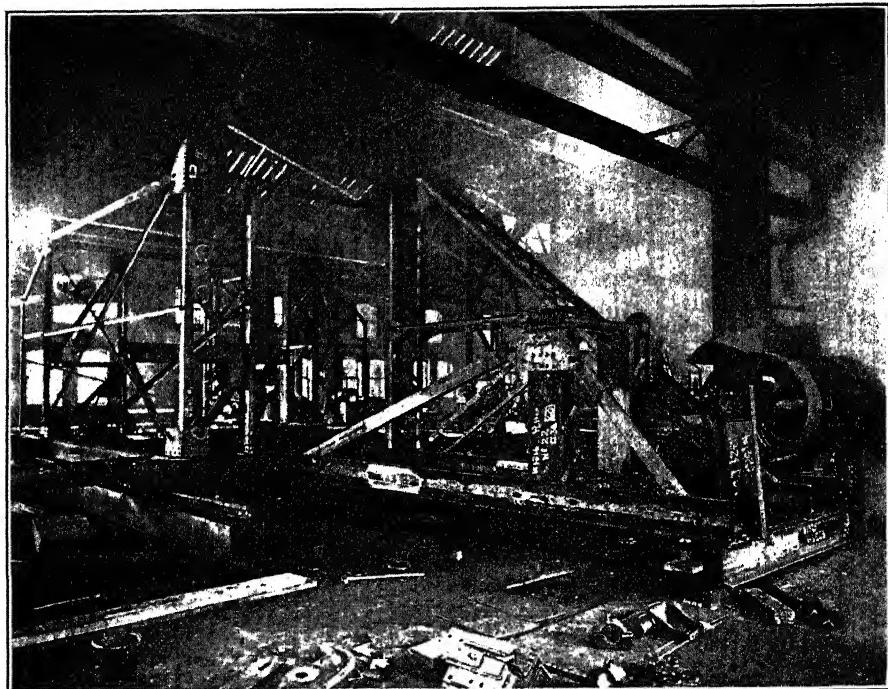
SOUTH AMERICAN STEEL DRILLING RIG, 1908. SHOP ASSEMBLMENT OF BOTTOM PANEL.
